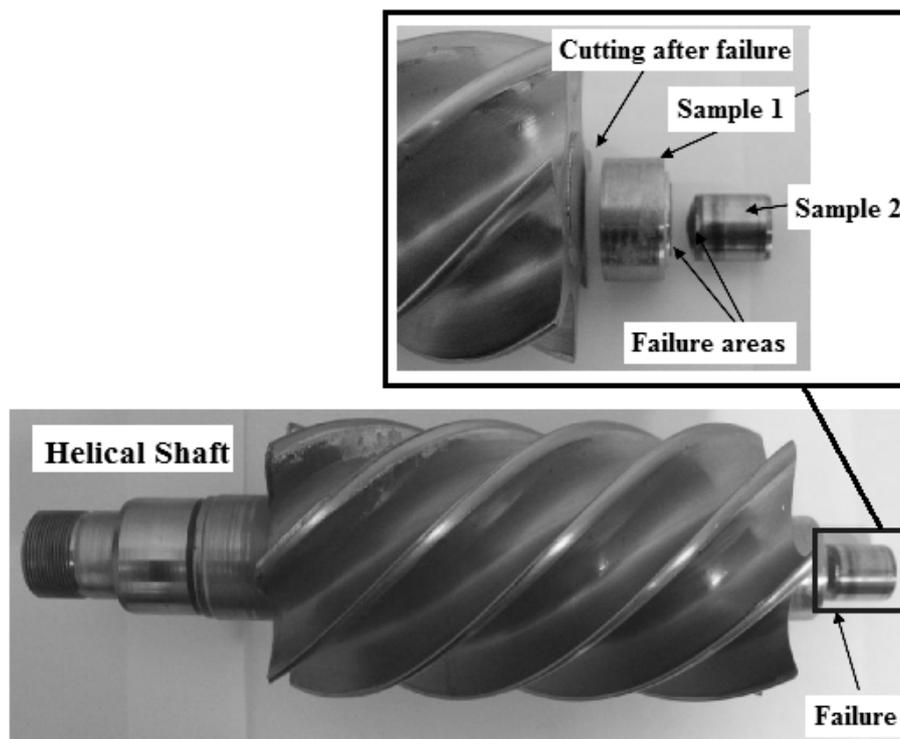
The Helical Shaft fracture areas – sample used in analysis
